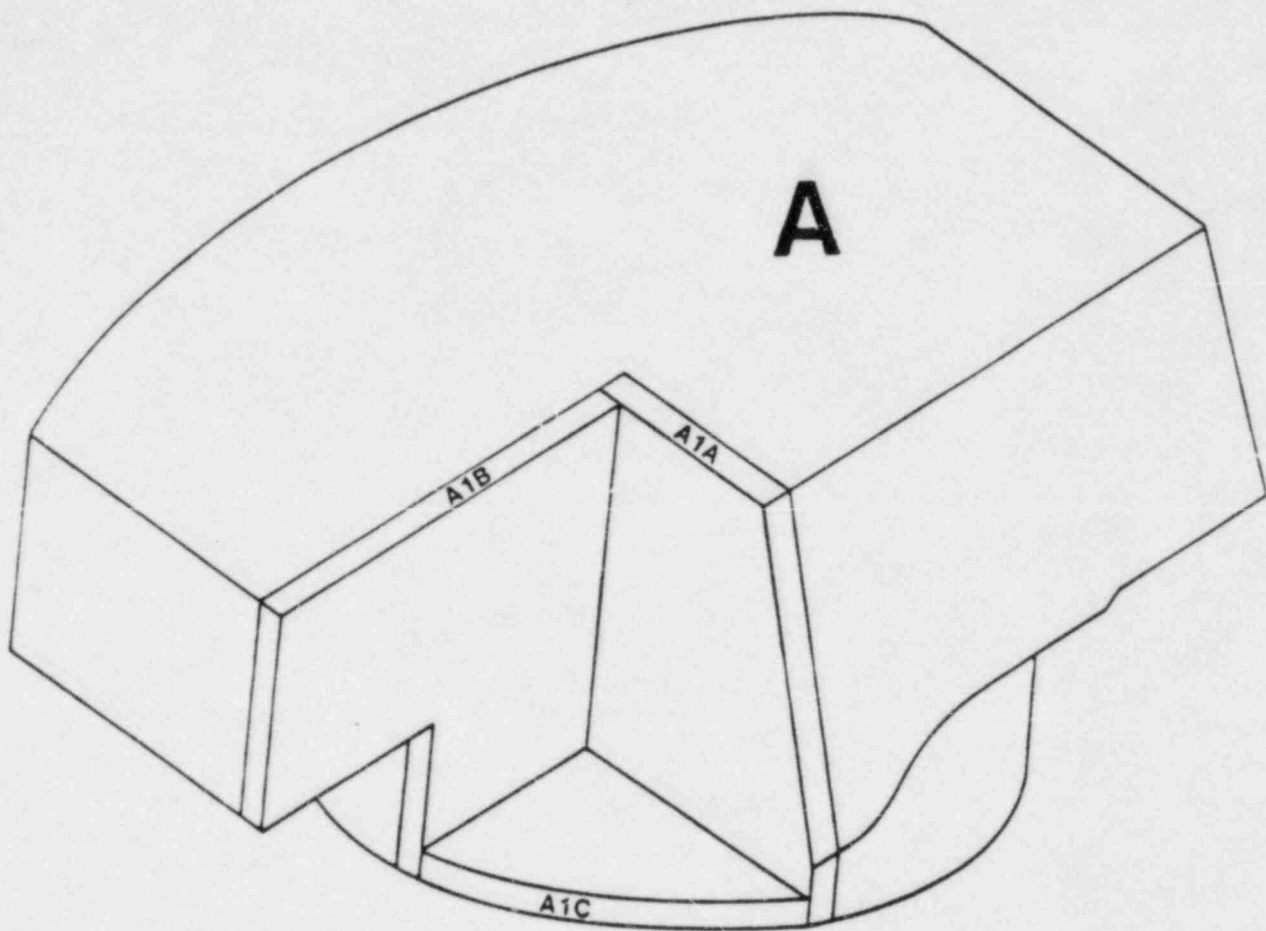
Sketch of section A that indicates the location of the orthogonal plates removed for macroetching, tensile tests, and hardness testing.
